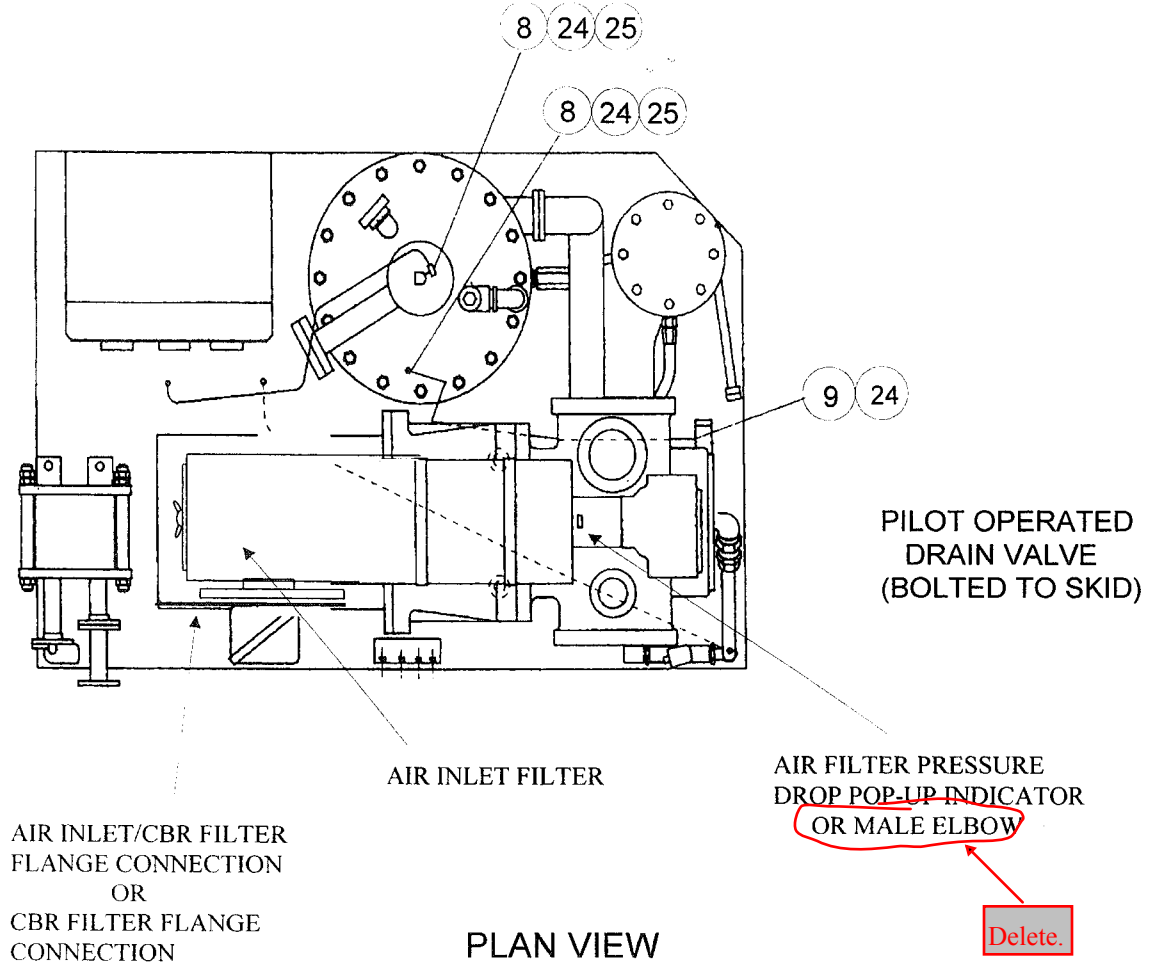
Instrumentation Arrangement (sheet 2 of 3)
